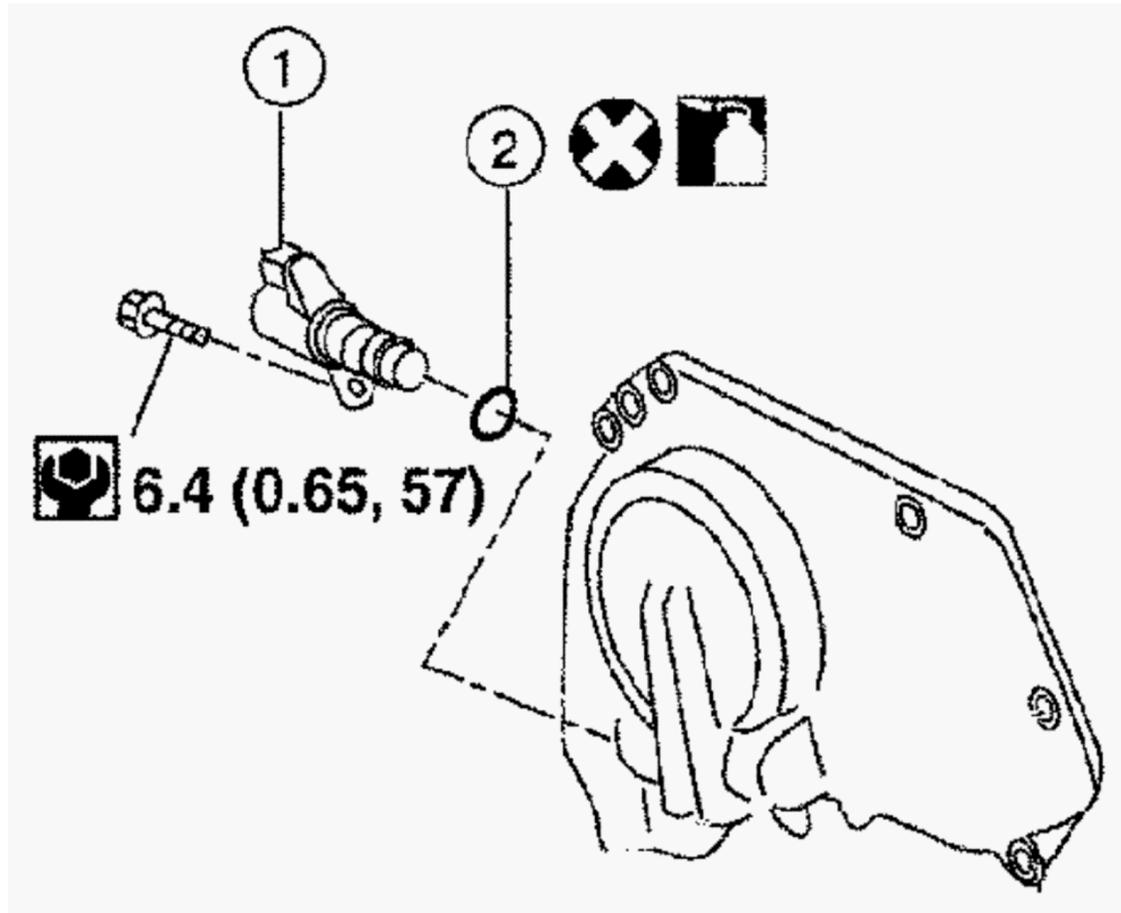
Identifying Intake Valve Timing Control Solenoid Valve & O-Ring
